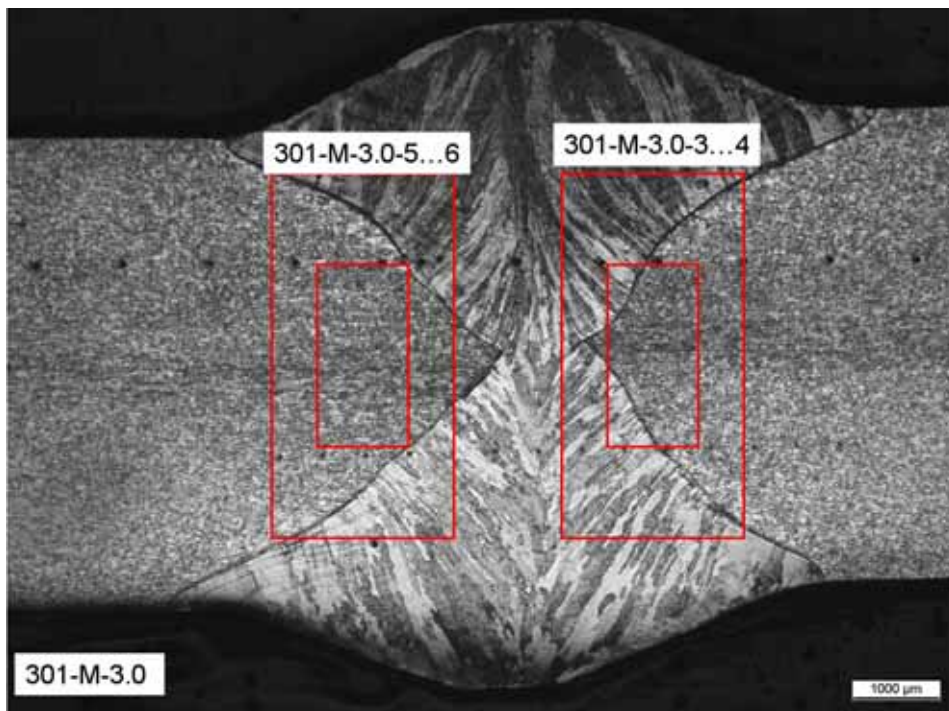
Example of the macrosection of the GMAW multipass welded austenitic EN 1.4318 (AISI 301 LN) steel, 5 mm plate thickness. Extraction of the  $1 \times 2$  mm<sup>2</sup> size flat-bar specimens (in realistic scale): inner rectangular lines: specimen's measuring gauge dimensions; outer rectangular lines: specimen-end dimensions. Right-hand side: specimen sampling the grain-coarsened HAZ immediately adjacent to the fusion boundary (with some weld metal included); left-hand side: specimen sampling the outer HAZ (without any weld metal involved) [2].
